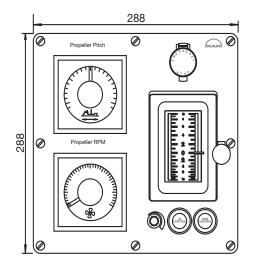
Bridge wing layout (outdoor) for single propeller plant
